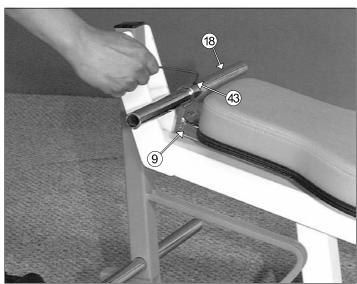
Secure the Foot Roll Tube 1 X 16 (#18) to the Bench Press Adj. Seat Frame (#9) using a Set Screw 1/4-20 X 1/4 (#43). Use the supplied Hex Key 1/8" (#86) for securing the Set Screw 1/4-20 X 1/4 (#43) into the threaded socket located on the Bench Press Adj. Seat Frame (#9).
